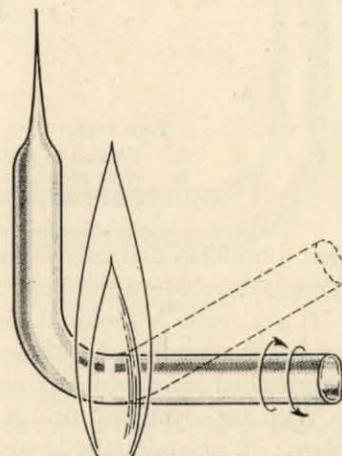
THE ROTATING TUBE IS HEATED AND BENT TO MAKE THE OTHER HALF OF THE U.
